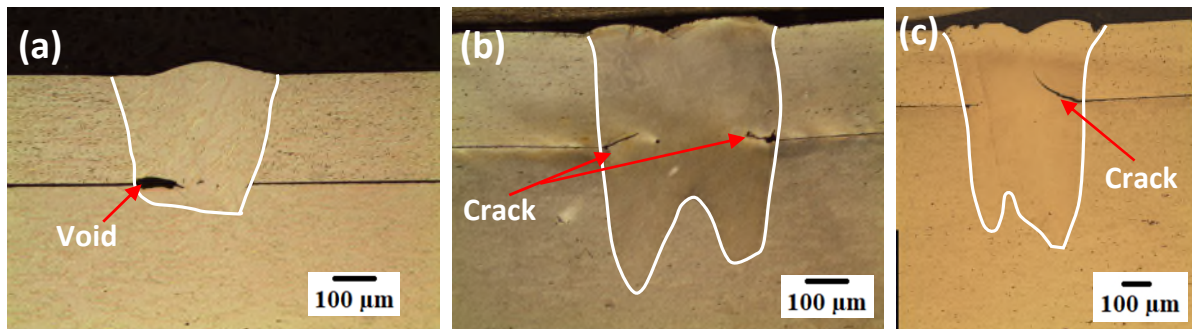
Macro view of the laser welded Al tab to Al busbar at (a) under-weld, P= 300 W (b) good-weld, P= 525 W and (c) over-weld, P= 675 W
